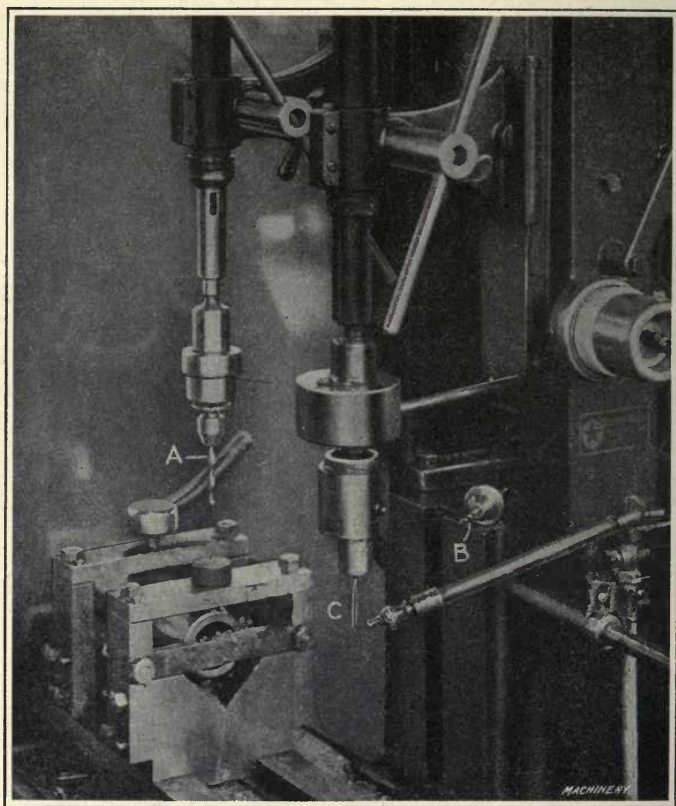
Drilling and tapping Hole for Fuse Fixing Screw
